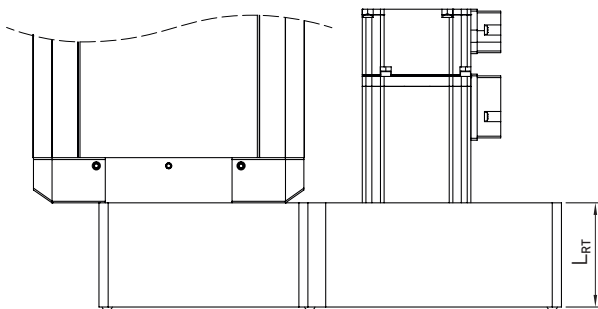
Motor connection of linear tables HT-S with belt drive
